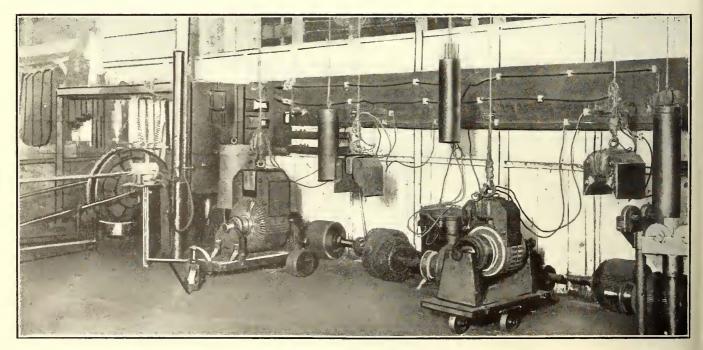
Boston Elevated Shops-Testing Plant for Armature Department
